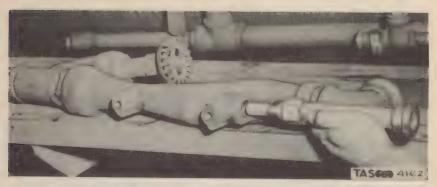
Removal of Injector Jet. which hold the assembly in place.
